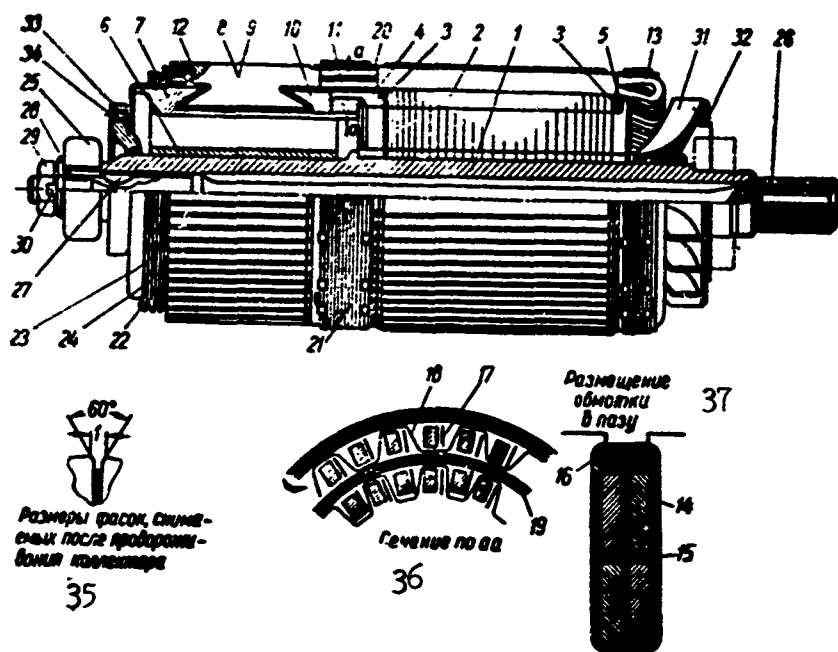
Construction of armature for 18-kw generator. 1) Hollow shaft; 2) steel assembly; 3) insulating sheet; 4) backup washer; 5) backup washer; 6) spider; 7) commutator sleeve; 8) commutator segment; 9) insulating insert; 10) backup washer; 11) nut; 12) insulating cone; 13) armature winding; 14) insert; 15) insert between tiers; 16) wedge; 17) mica strip; 18) insulation; 19) insert; 20) insulation; 21) banding; 22) copper pin; 23) equalizer circuit; 24) insert; 25) ball bearings; 26) spring; 27) key; 28) washer; 29) nut; 30) locking tab; 31) fan; 32) brass disk; 33) flange; 34) gland packing; 35) dimensions of bevels made after commutator grooves have been cut; 36) section through AA; 37) arrangement of winding in slot.
